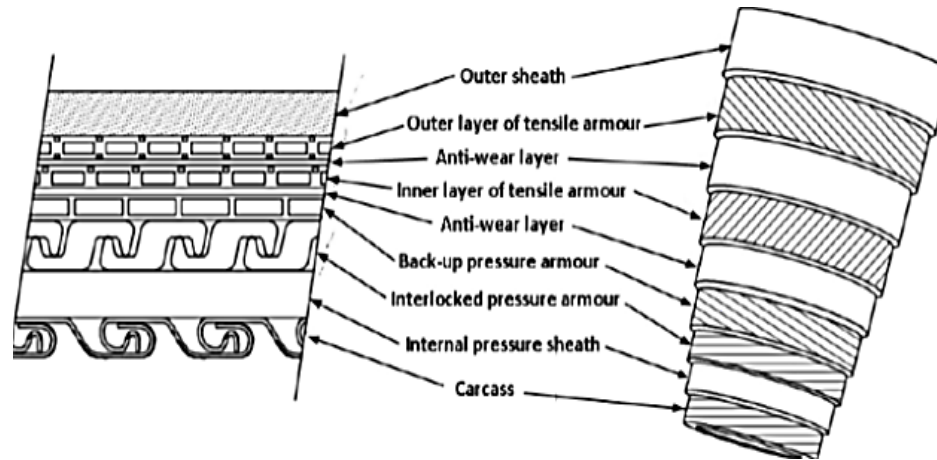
Typical non-bonded flexible pipe structure [7]
